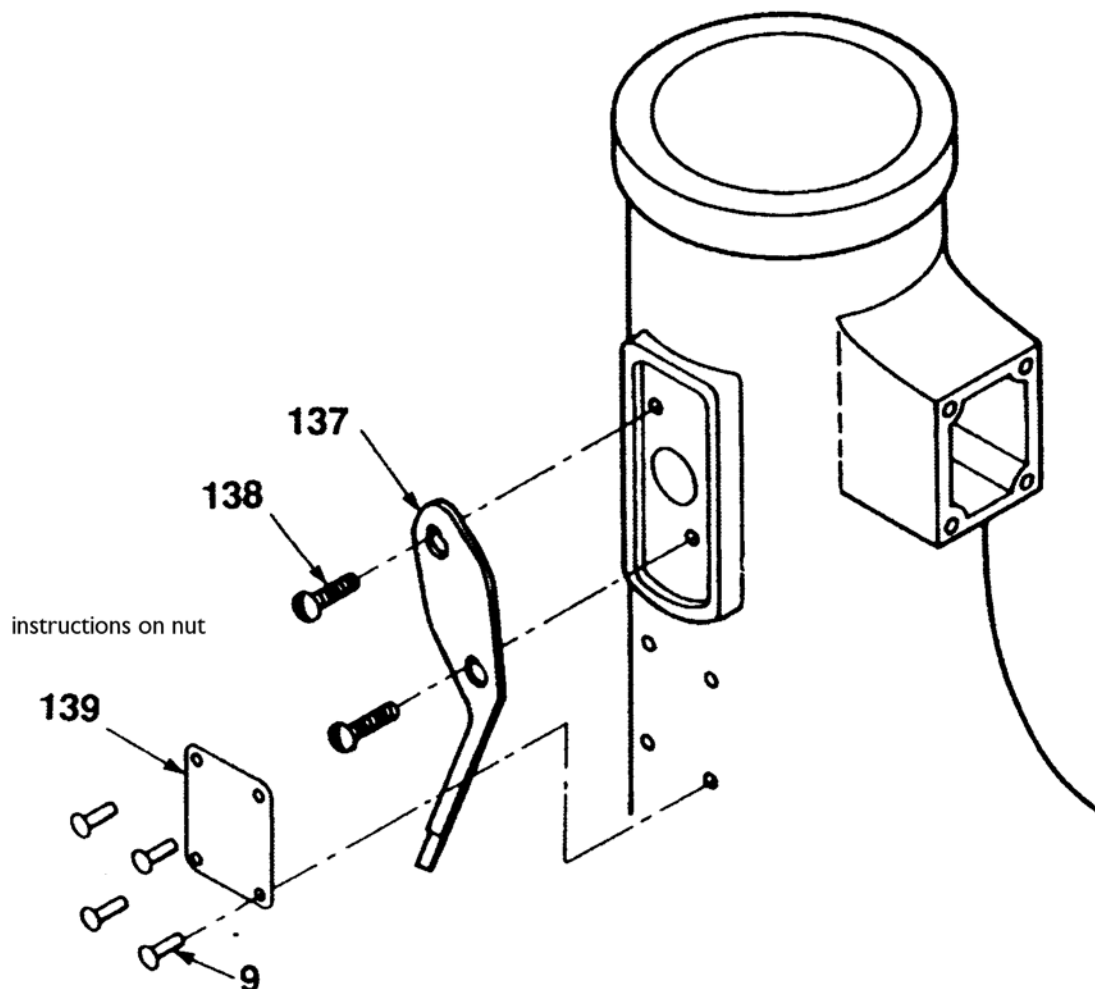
EXPLODED ILLUSTRATION OF GAGE AREA FOR 126CMJ, 132CMJ, AND 144CMJ JACKS
